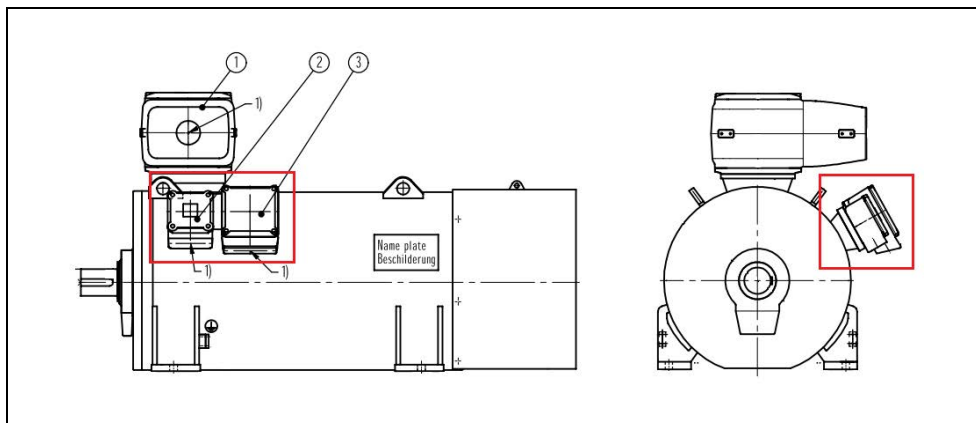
Innomotics HV C steel-welded housing IC411 IM B3, standard positions of auxiliary terminal boxes
